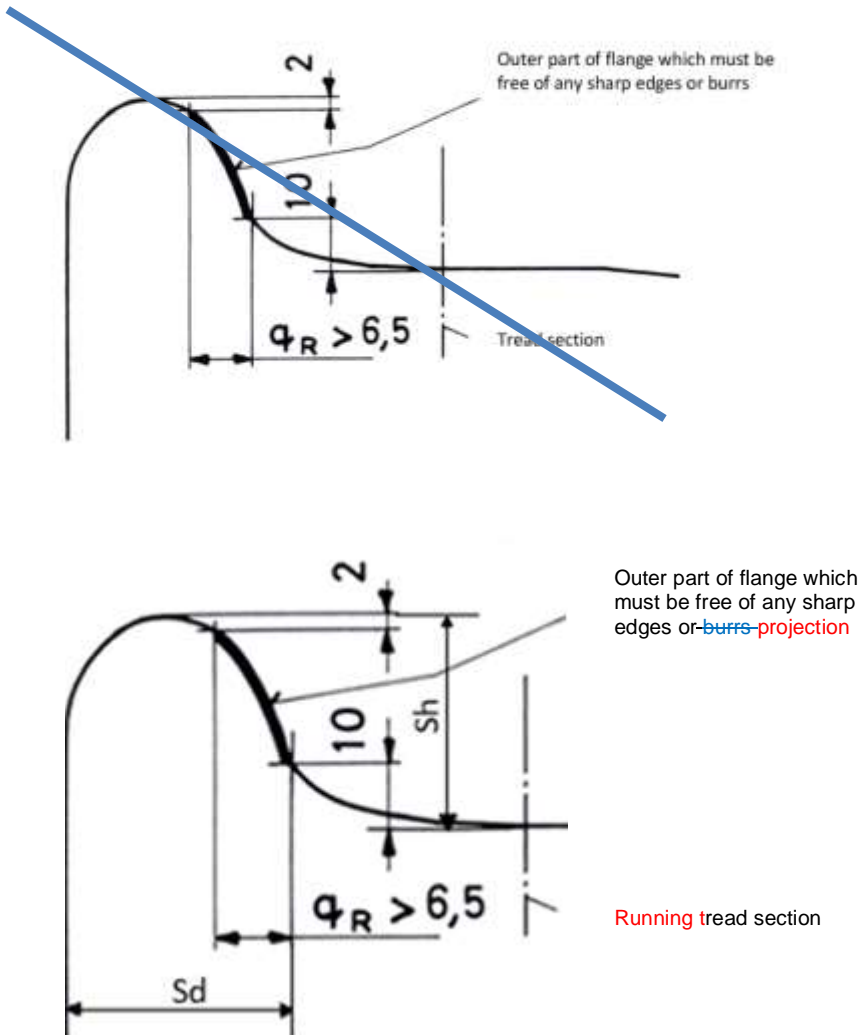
Gauge for verifying qR Dimensions of combined gauge for verifying qR, Sd, Sh, including projections and false flanges
